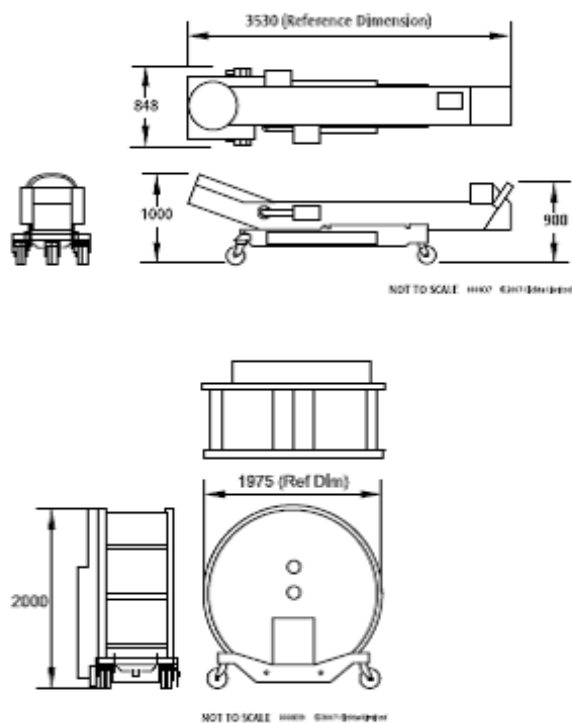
Scalable drawing of drum and beam arm on transport trolley
